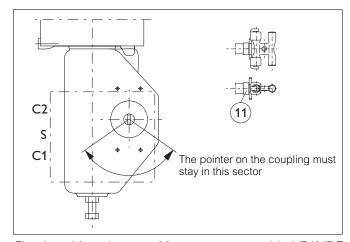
Mounting on Metso actuator with VDI/VDE mounting face
